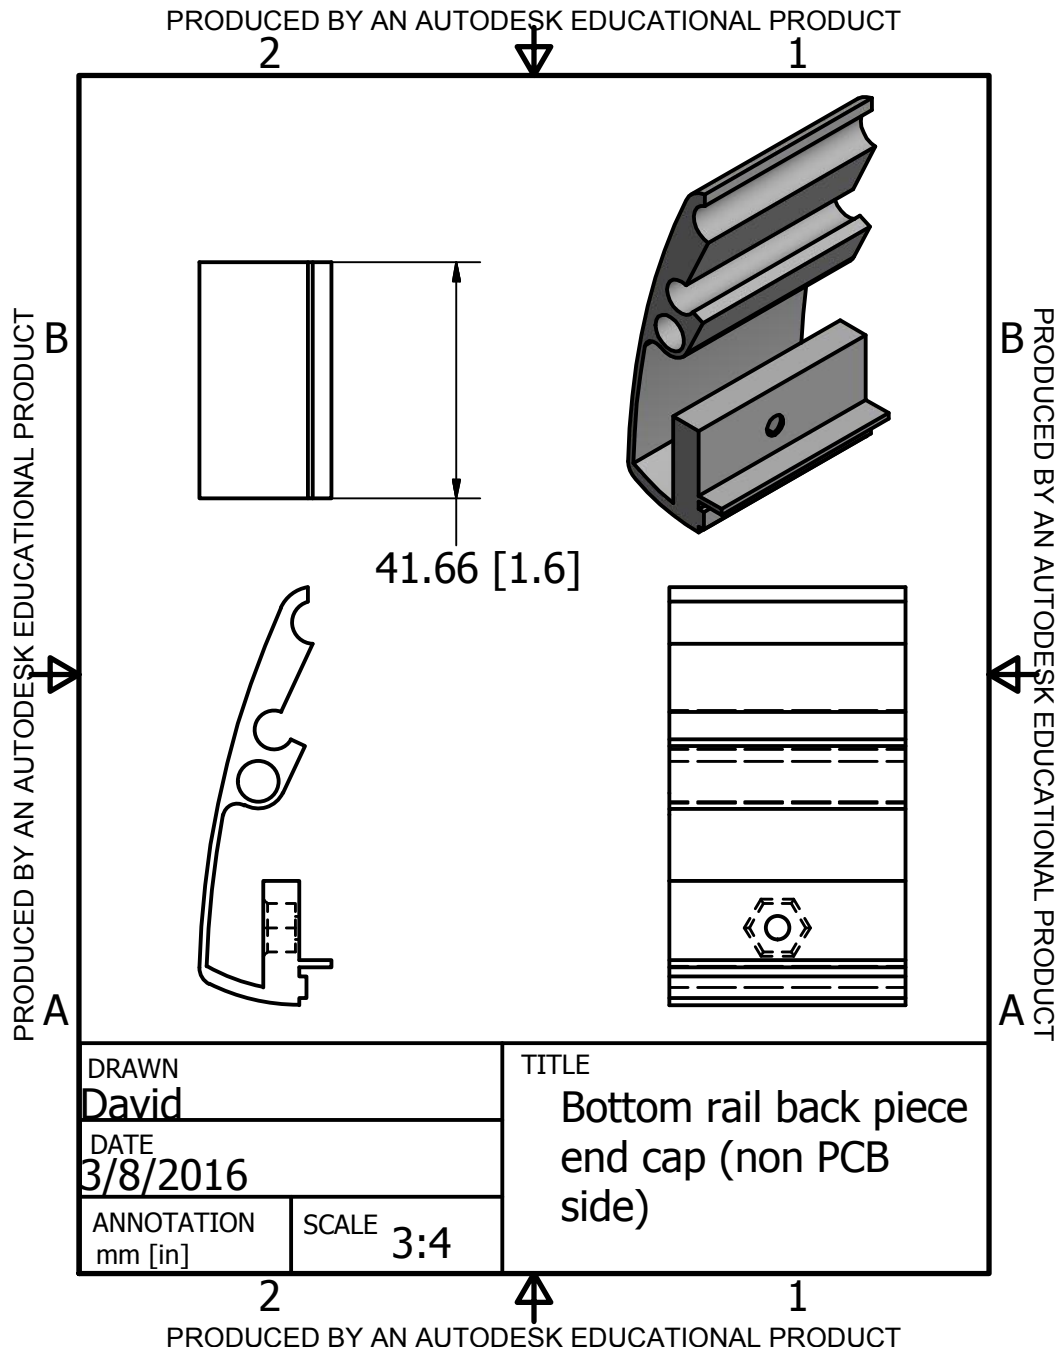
Mechanical drawing for the back piece end cap for the side of the bottom rail that does not accept wall adapter power.
